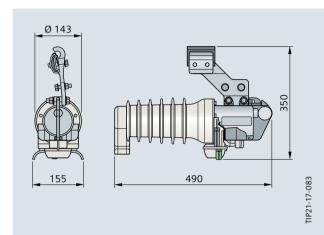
/6: Dimensions for Fusesaver 3AD8 with communication module and cable connection system (dimensions in mm)
